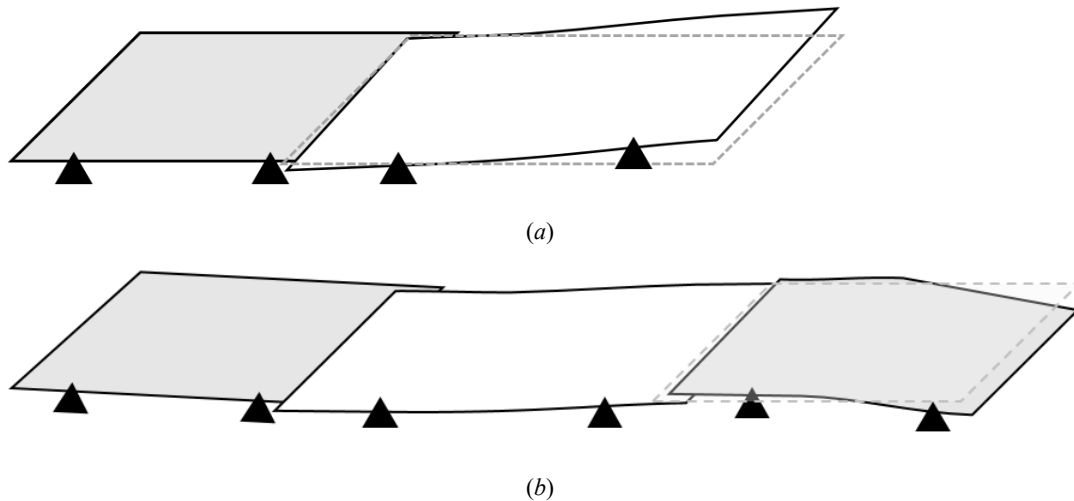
Two-station assembly: (a) two parts are assembled in Station 1, (b) extra part is assembled to sub-assembly in Station 2.
